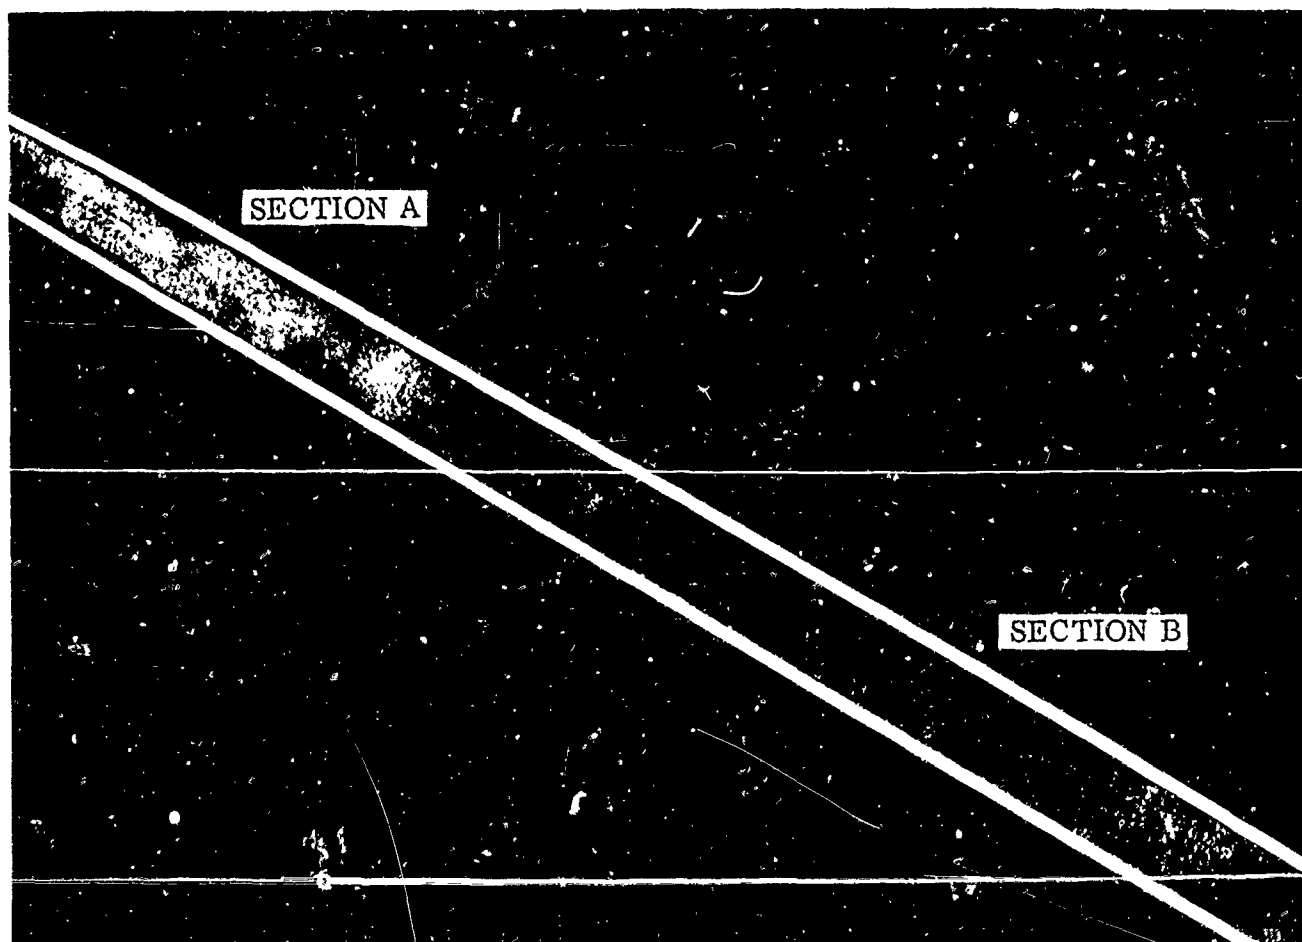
Surface appearance of coatings formed within fluidized bed (Section A) and above fluidized bed (Section B). Section A coating is smooth adherent, and 2.5 mils thick. Section B coating is rough, somewhat nonadherent, and about 4 mils thick.
